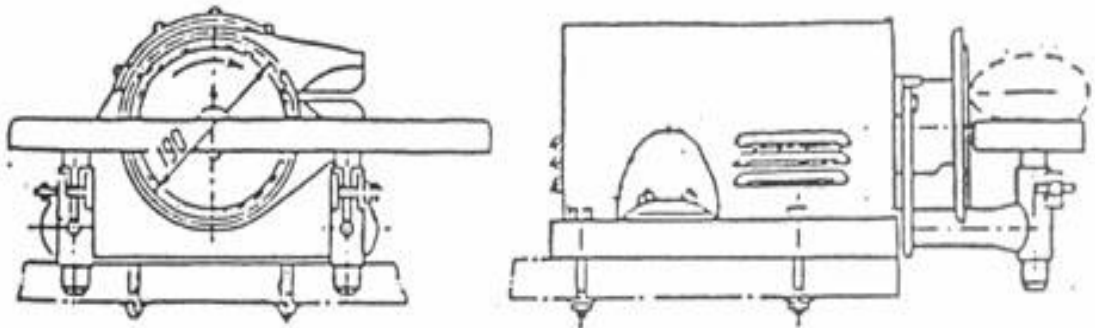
Equipment for cutting out the fins, employing a disc knife
